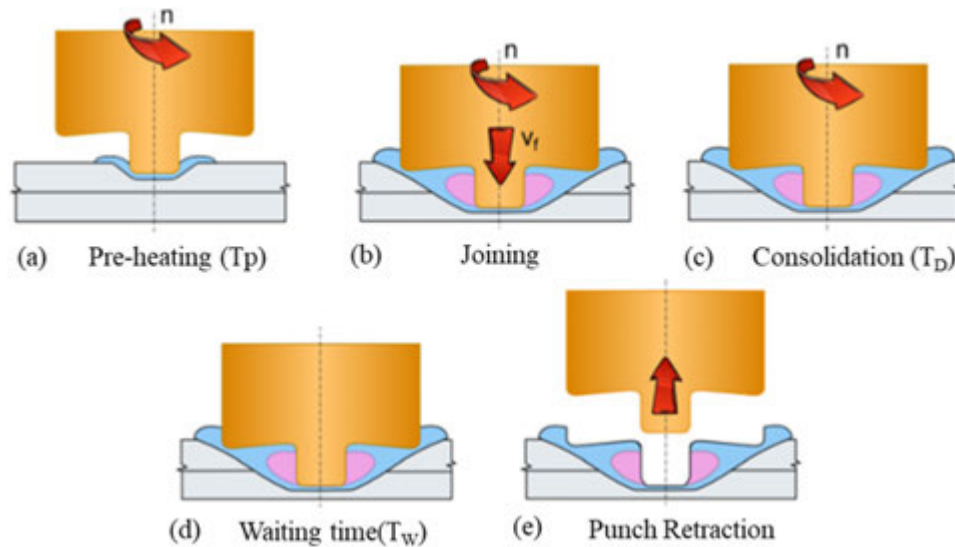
Different stages of friction stir spot welding. Reproduced from Lambiase, F., Paoletti, A., Di Ilio, A., 2015. Mechanical behaviour of friction stir spot welds of polycarbonate sheets. *International Journal of Advanced Manufacturing Technology* 80 (1–4), 301–314.
